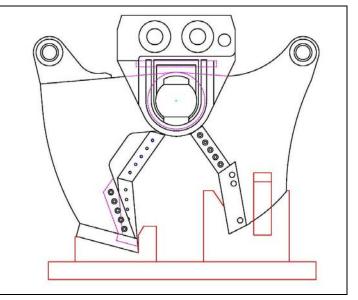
Stand Fixture for Shear Jaw / Coupler
